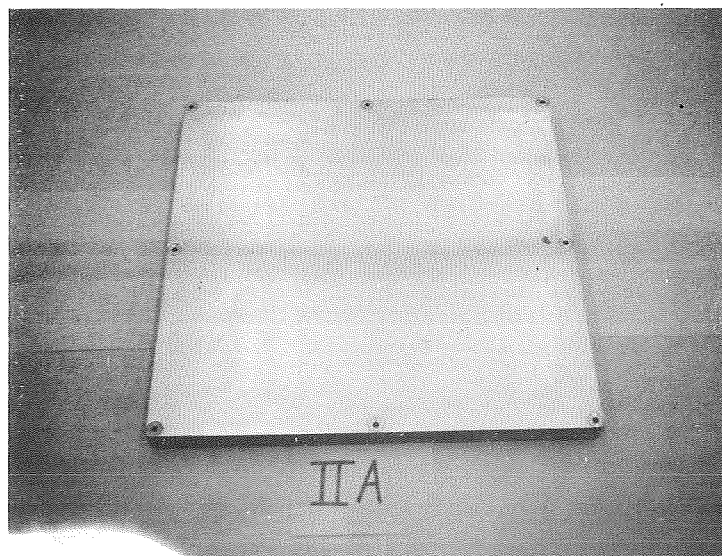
Top View of Engineering Test Model IIA Endplate (Aluminum Honeycomb with Aluminum Facesheets)
